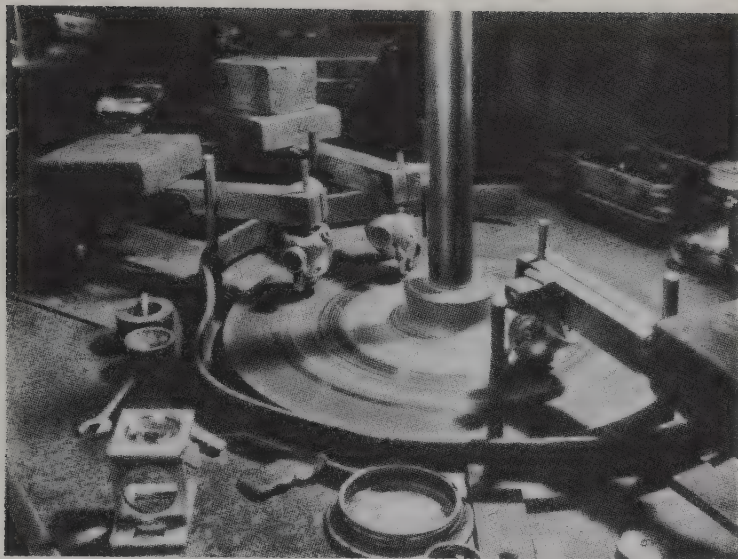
Mechanical clamp-type dops holding diamonds on a scaife. The dops are mounted in the end of tongs, which are weighted to achieve the necessary polishing pressure (courtesy of De Beers)
